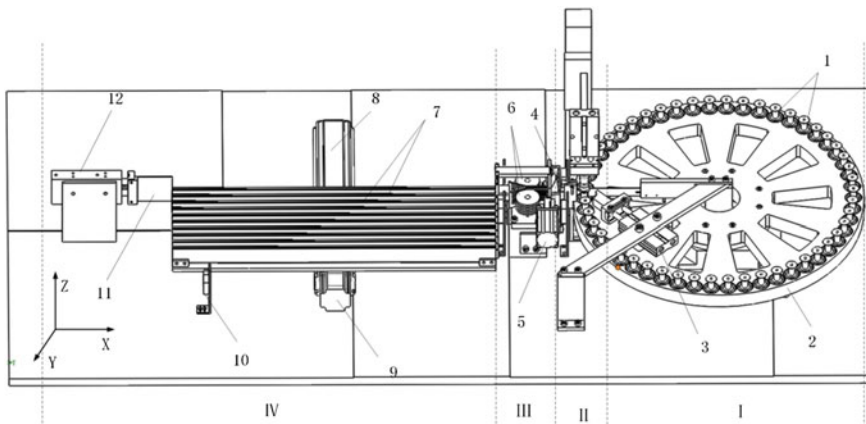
Schematic diagram of the automatic winding machine (1 embedment, 2 circular panel, 3 air cylinder for pressing, 4 cutting mechanism, 5 air cylinder for driving cutter blade, 6 a pair of rollers, 7 groove for storing strip, 8 linear slide, 9 stepper motor, 10 limit switch, 11 sheet, 12 air cylinder)
